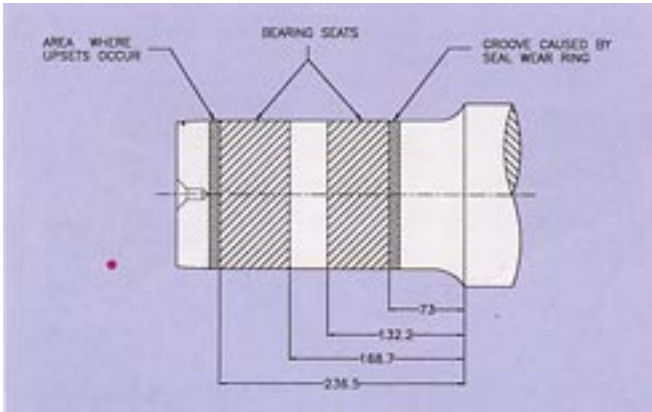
Locations of Bearing seat Areas, Wear Ring groove and upset ends on 6 x 11 journal. BRENCO-NBC
